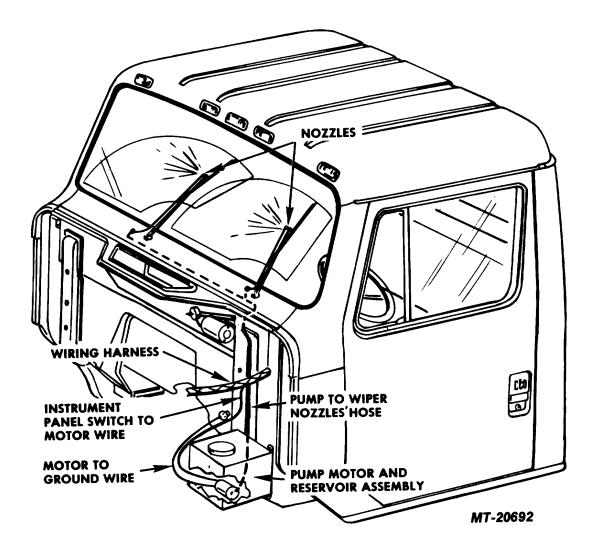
Windshield Washer Installation (80" Wide Cab Shown)
